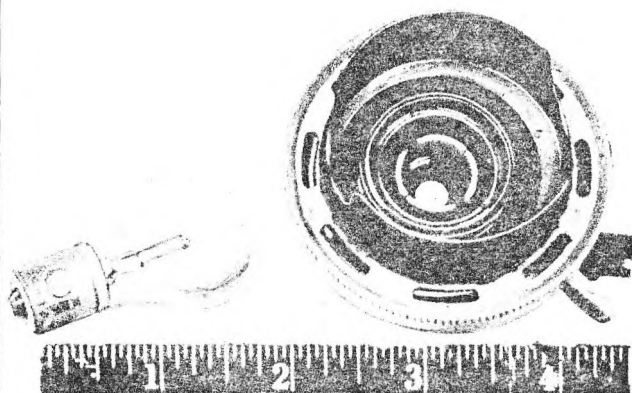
LAMP UNIT Photo-electric Cell Assembly.
